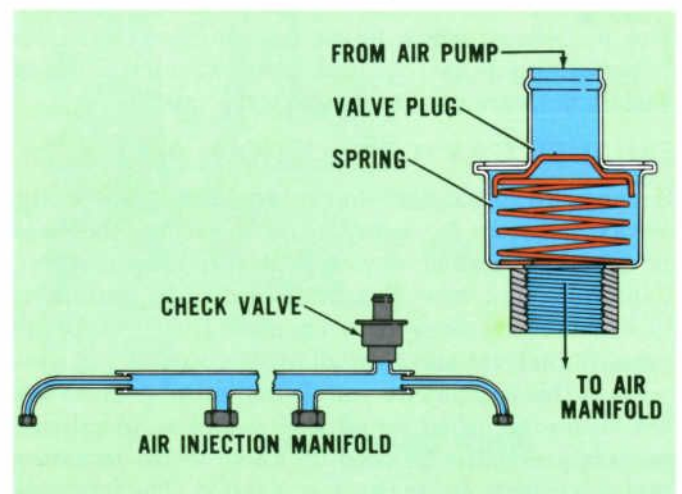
CHECK VALVE AND AIR INJECTION MANIFOLD
